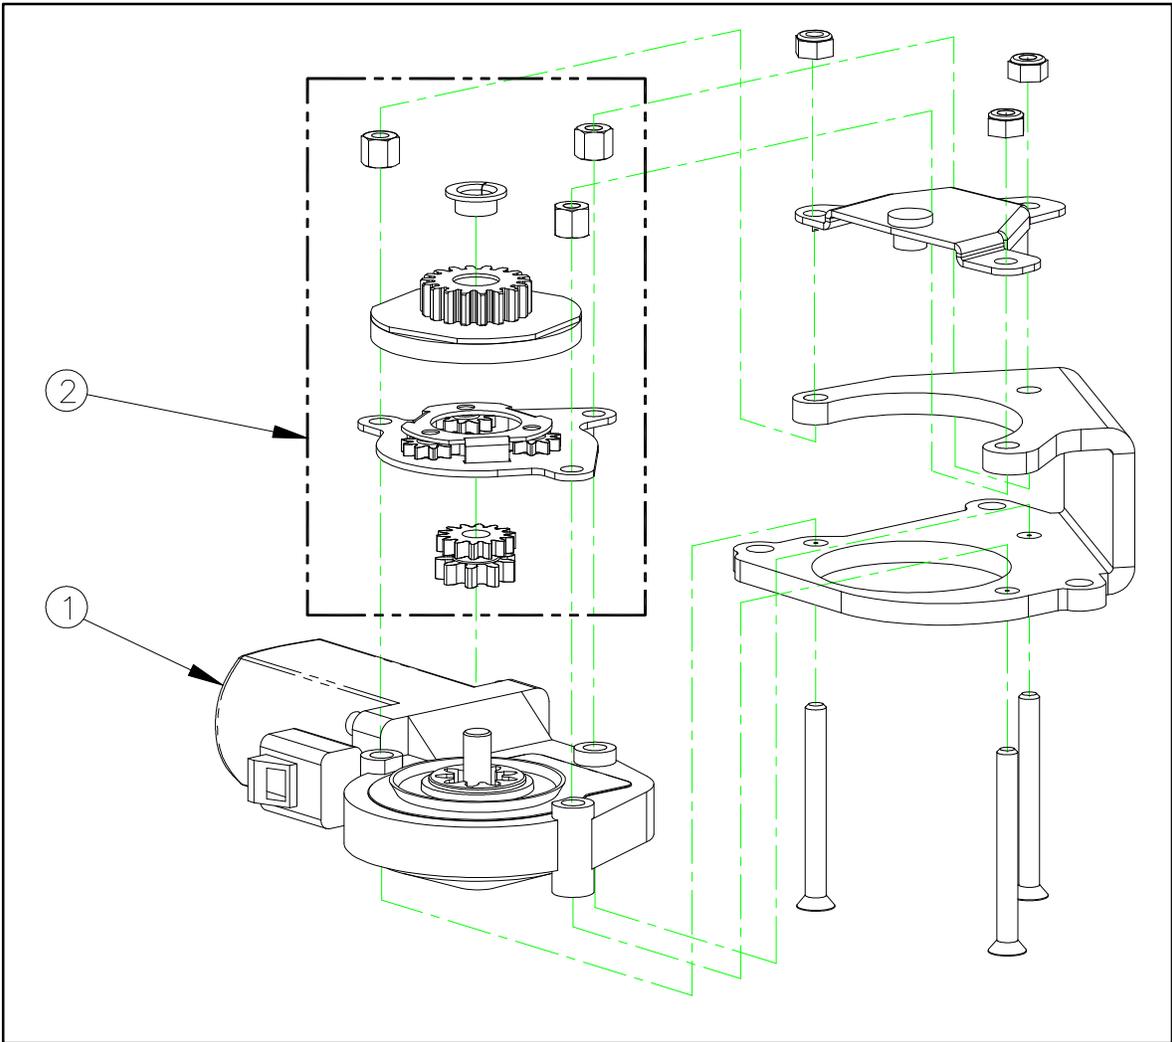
PLATFORM WRAP MOTOR ASSEMBLY
